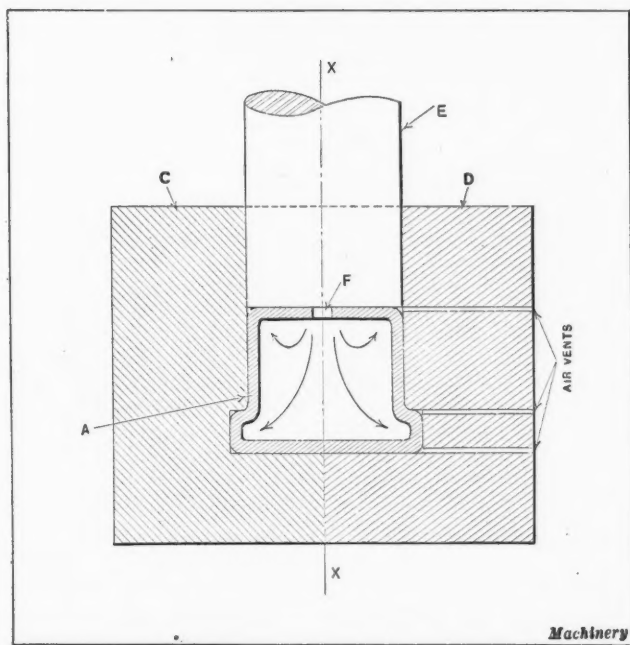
Sectional View of "Oil Extrusion" Die for Final Forming Operation on Shell A
